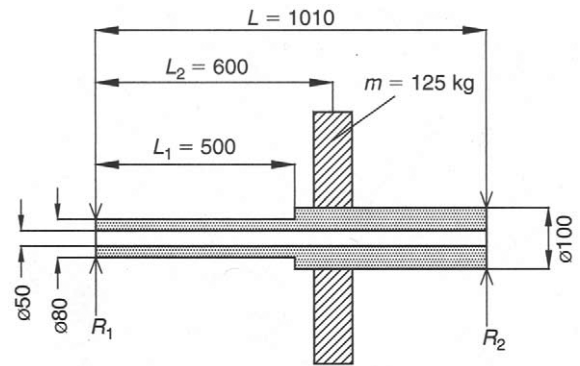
Simple stepped shaft and load (dimensions in mm).
